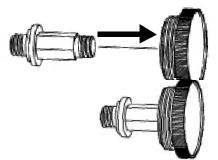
Turning Pressure Selecting Screw Over and Attaching to Regulator Cap – Propane/LP Position
